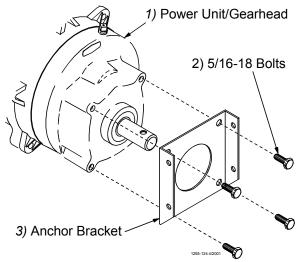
Assemble the Anchor Bracket to the Power Unit/Gearhead
